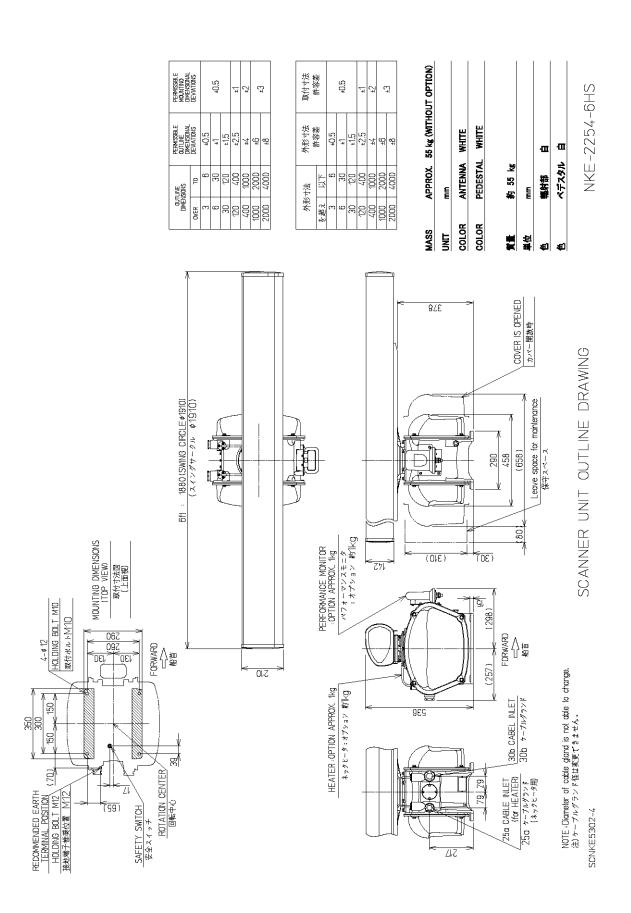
Outline Drawing of Scanner Unit, Type NKE-2254-6HS
